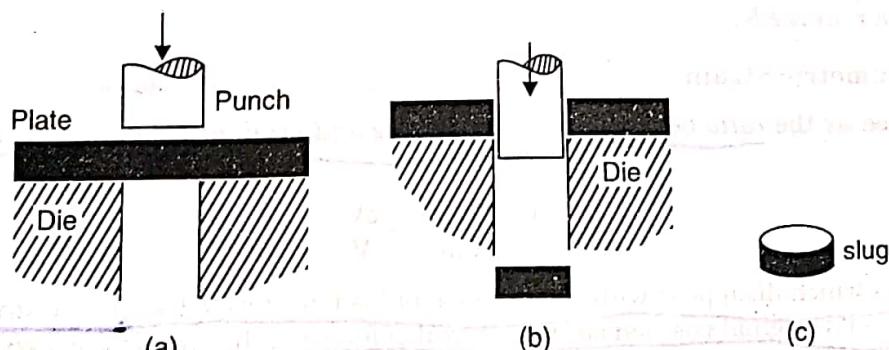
(a) Punch approaching plate; (b) Punch shearing plate; (c) Slug showing sheared area.
